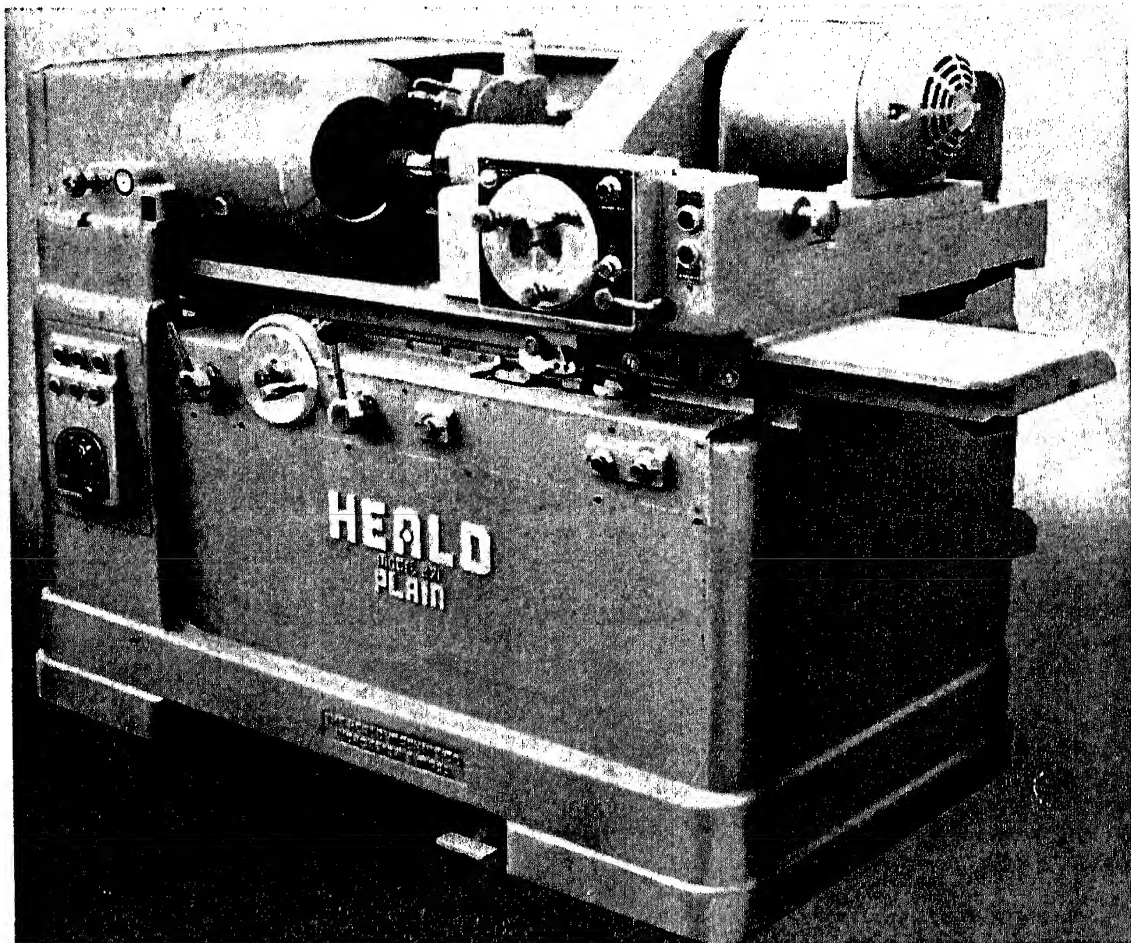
A plain internal grinding machine for holes up to 7½ in. diameter by 5 in. long. (Courtesy The Heald Machine Co.)
